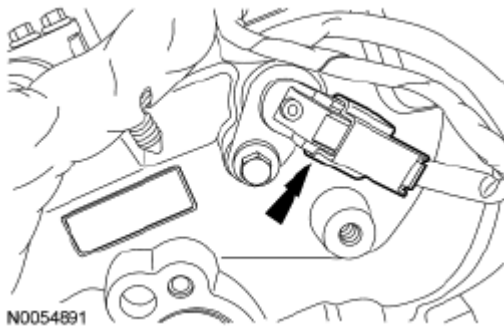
Locating Camshaft Position (CMP) Sensor Electrical Connector LH Side
